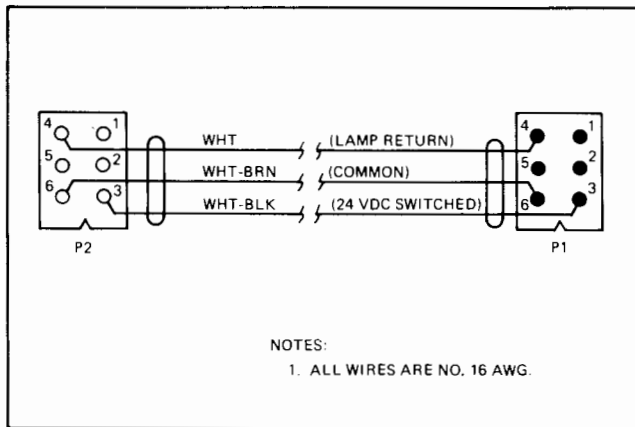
PCU-to-PCM/PCM Interconnecting Cable
